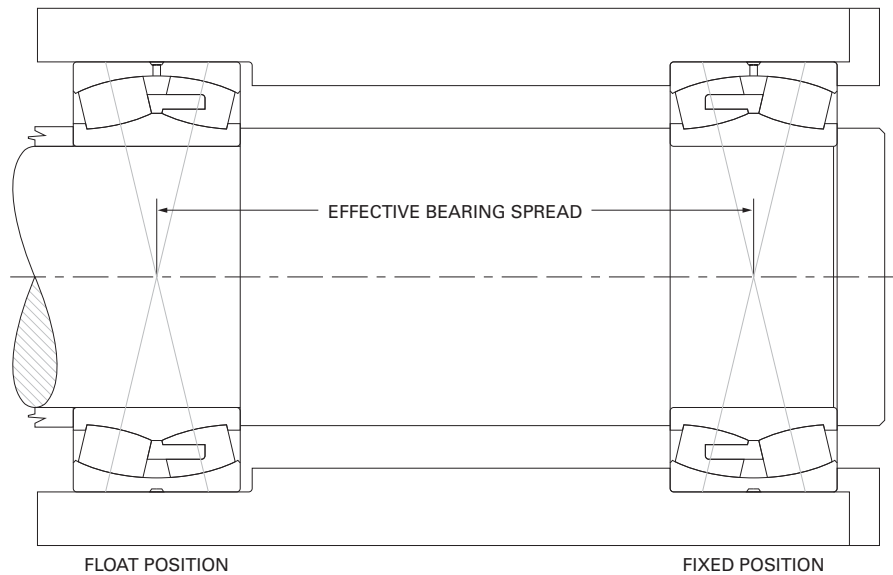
Typical mounting configuration for spherical roller bearings showing the position of effective load carrying centers.
